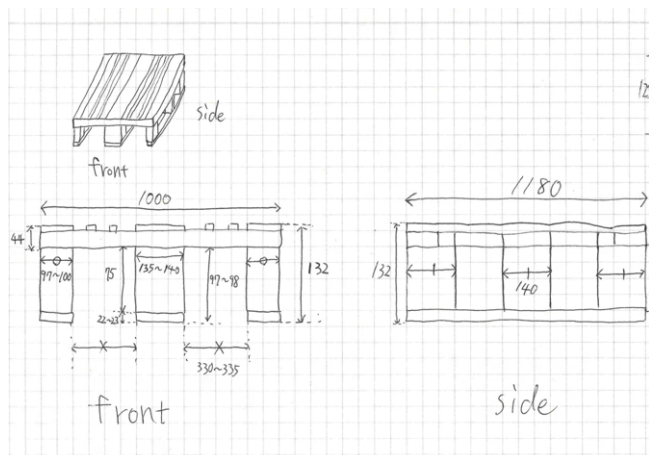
A drawing with the dimensions of our wooden pallets².
